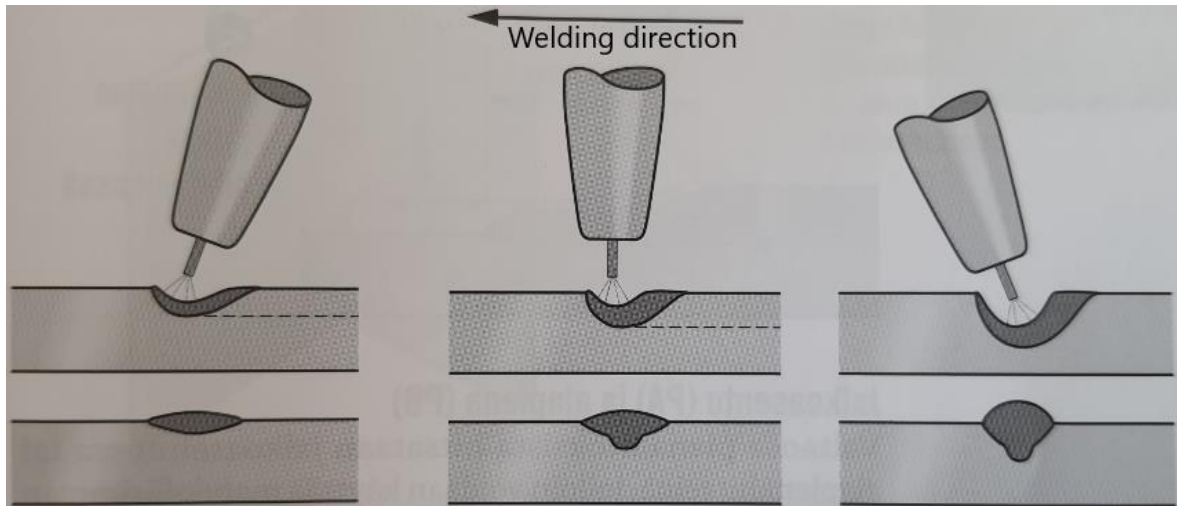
Torch positions effect on a weld bead shape (Lepola & Ylikangas 2016, p.89).
